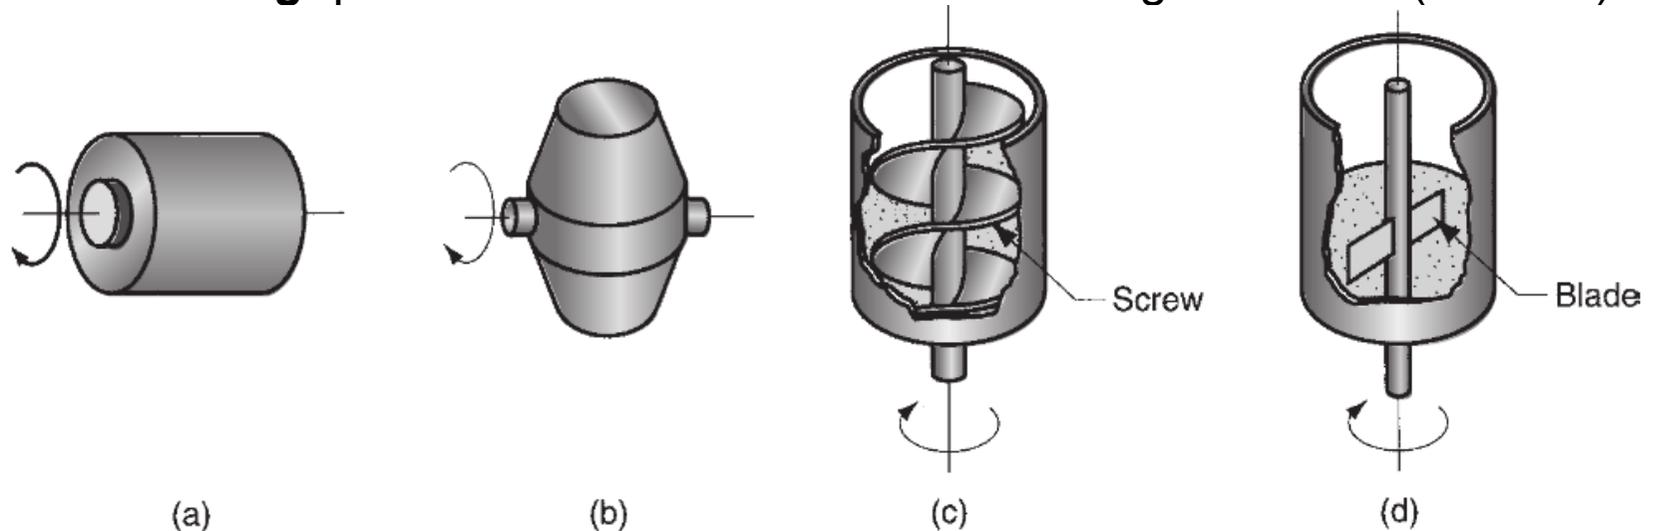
Several blending and mixing devices: (a) rotating drum, (b) rotating double-cone, (c) screw mixer, and (d) blade mixer.
